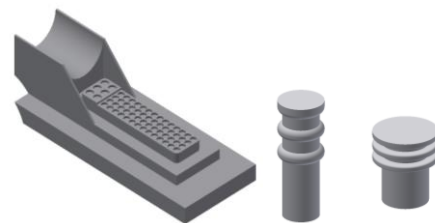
Cable plug terminal for seal placement (left). Seals of different size (right). (3D CAD model).
